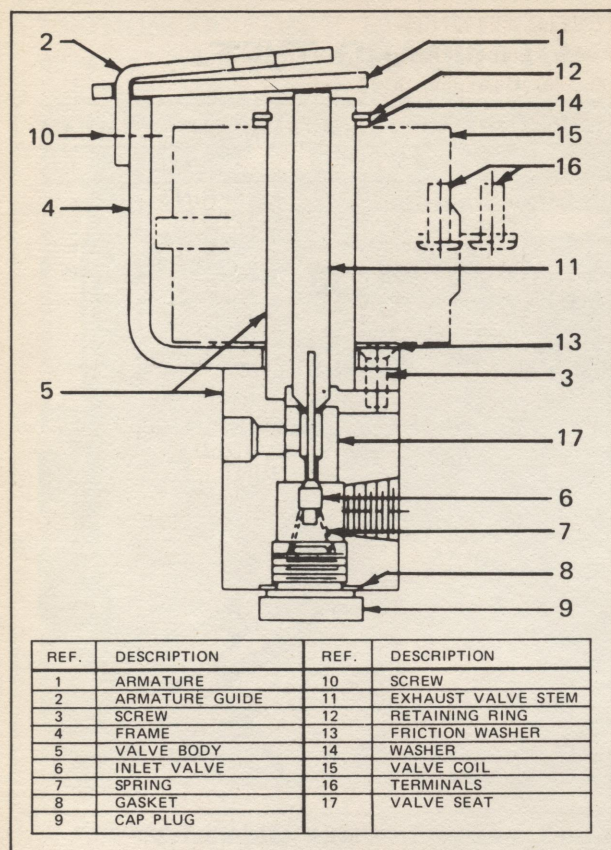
SECTIONAL VIEW OF MAGNET VALVE.
